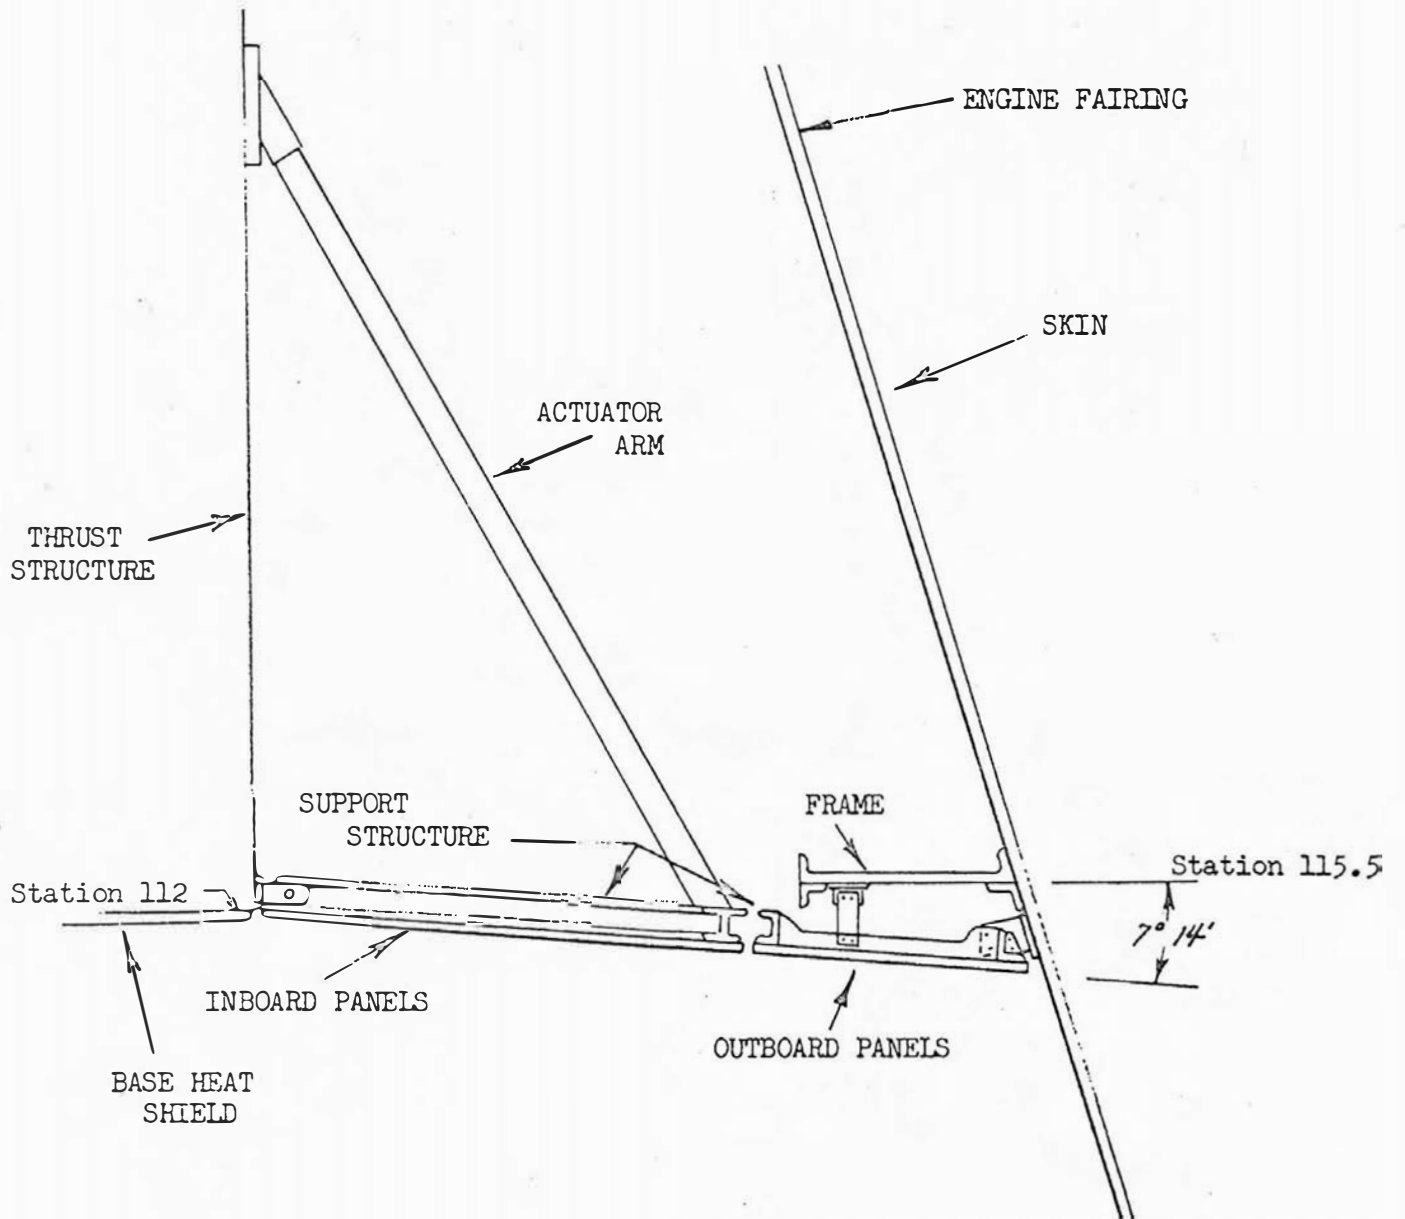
38. Engine Fairing Heatshield Assembly - Cross-Section View
